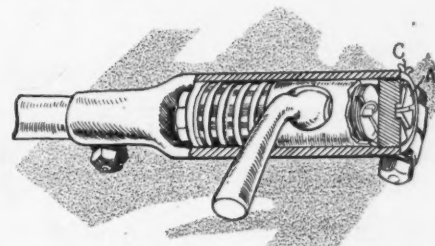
REMOVING PLAY FROM STEERING MECHANISM
